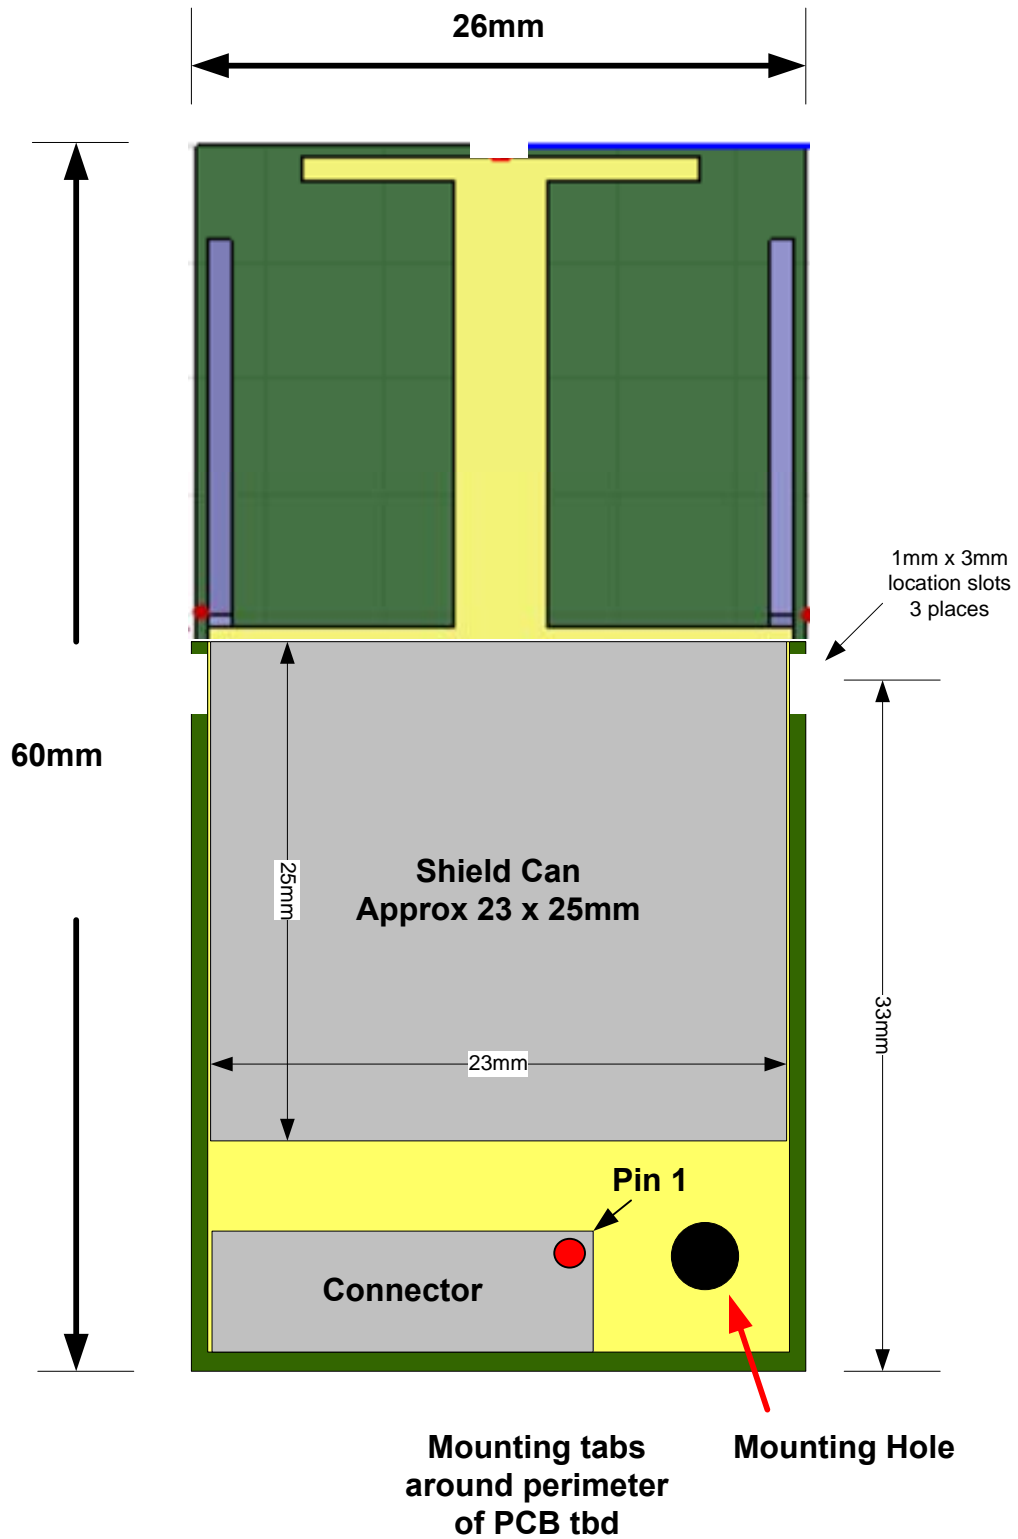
AVMD6210-SWA12 mechanical dimensions
